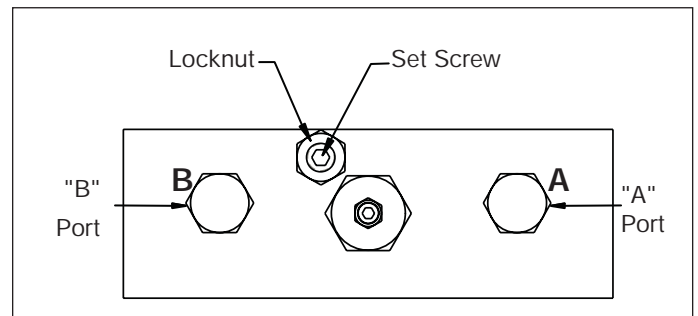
, Adjustment Details, Retract-Side Pressure Limiting Valve
